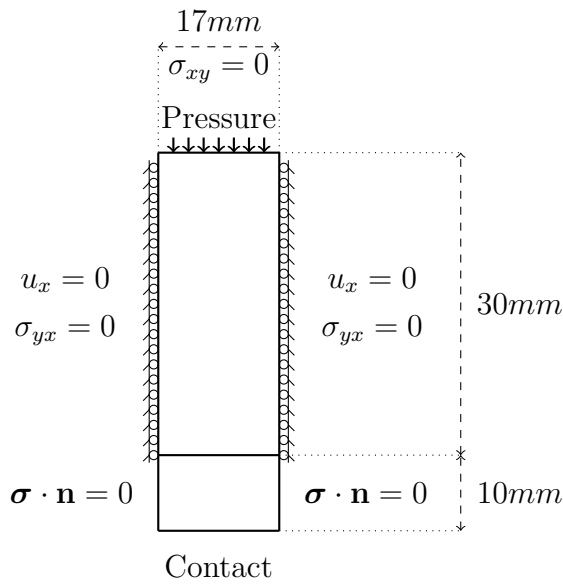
Geometry and boundary conditions of the linear friction welding problem in [41].
